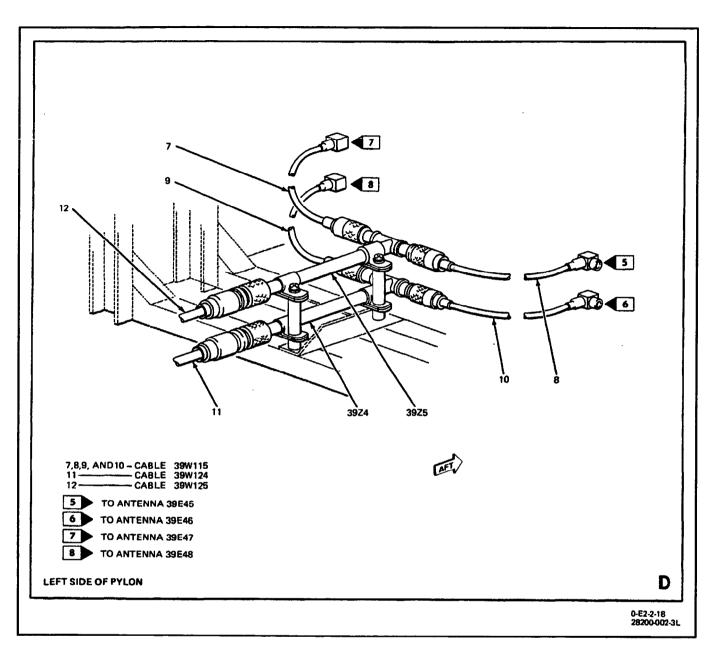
Removal and Installation of Configuration 2 Power Splitters and Cable Assemblies (Sheet 3)
